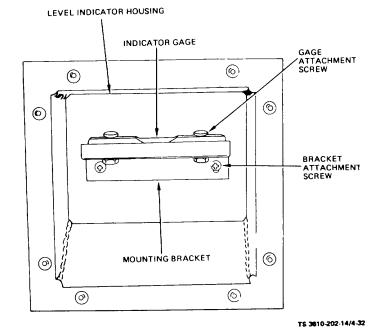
Level Indicator Gage, Removal and Installation 4-55
